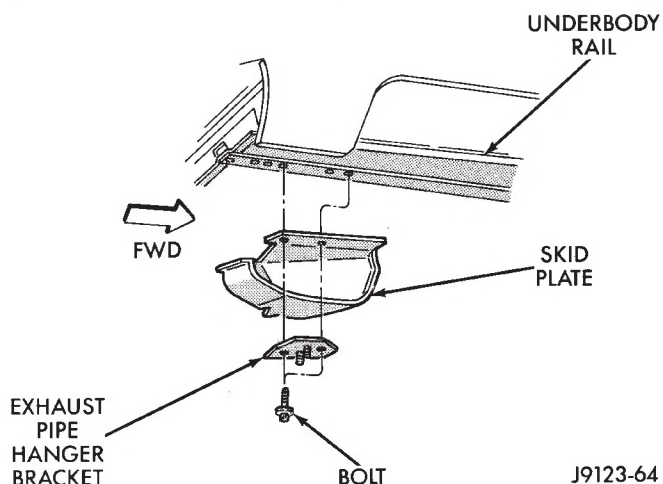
Fuel Tank Skid Plate W/O Trailer Hitch Or Tow Hook
